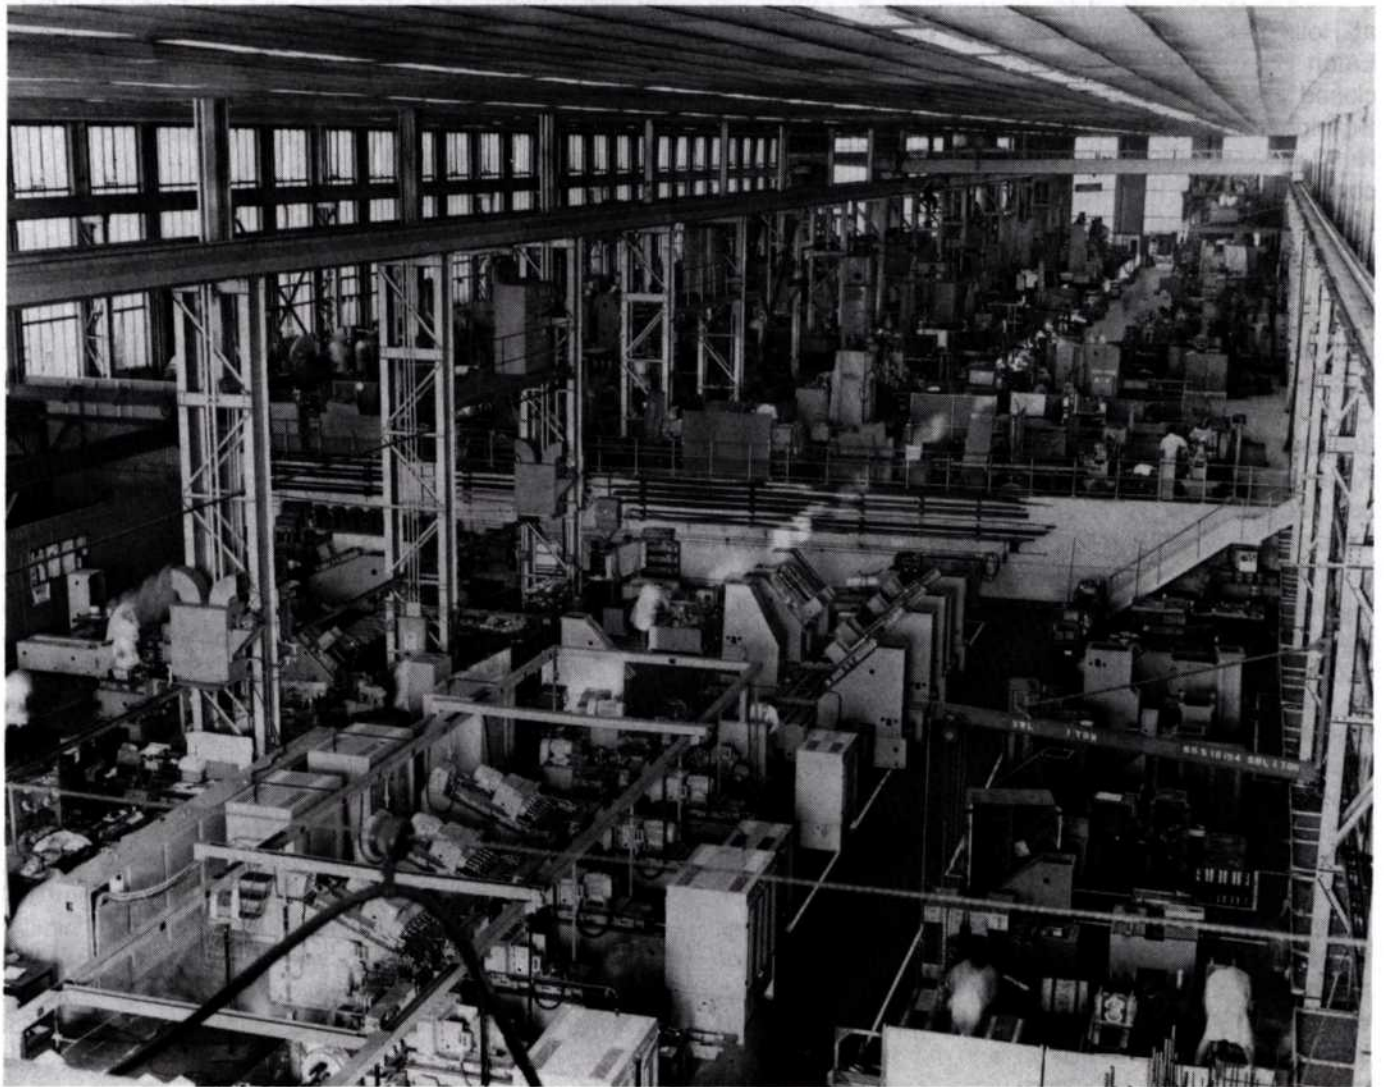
Manufacture of transfer machines at the Hollingbury Works of Kearney & Trecker c.1970
